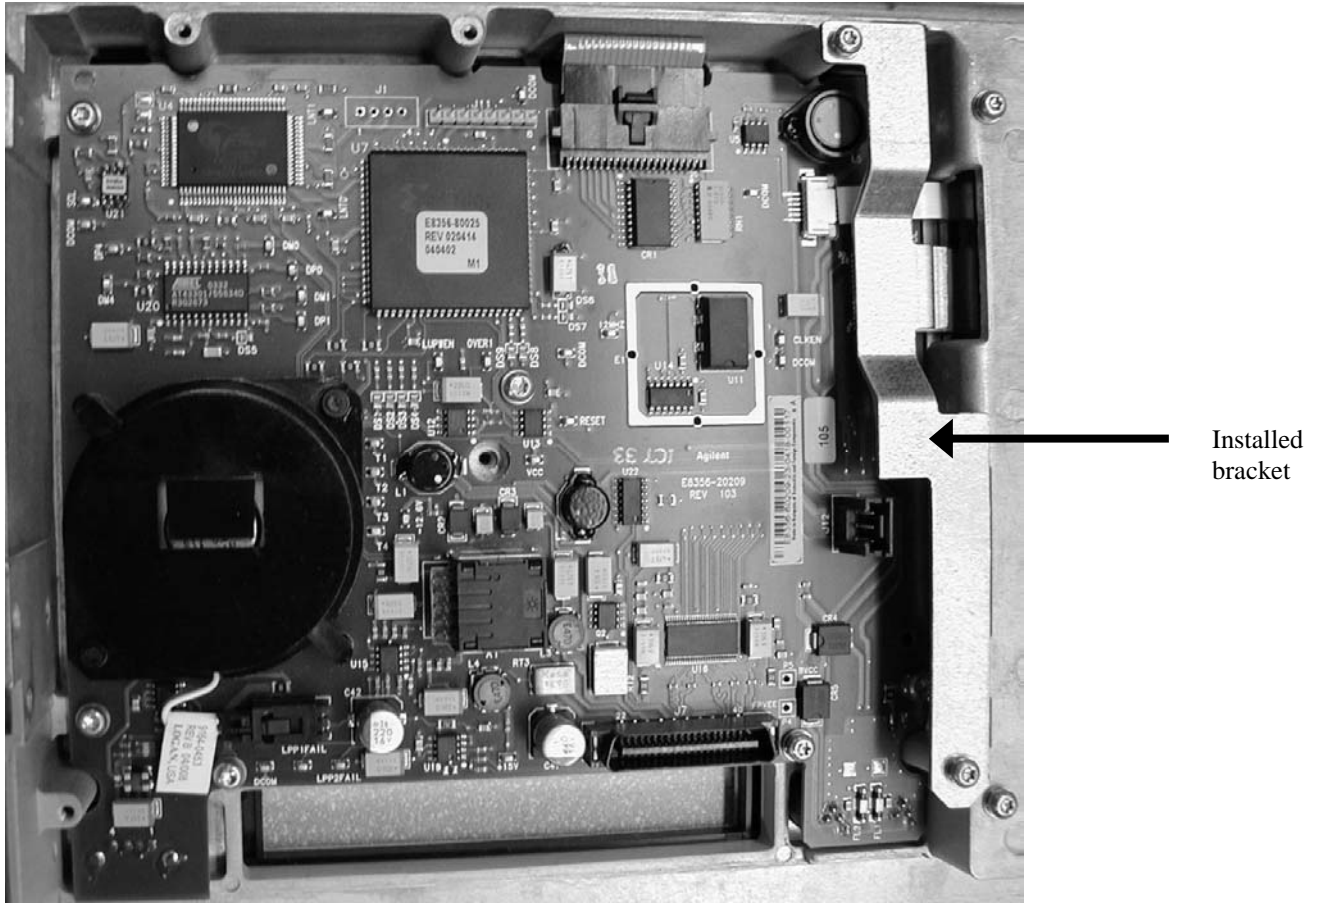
A3 Front Panel Interface Board Assy with the Bracket Installed
